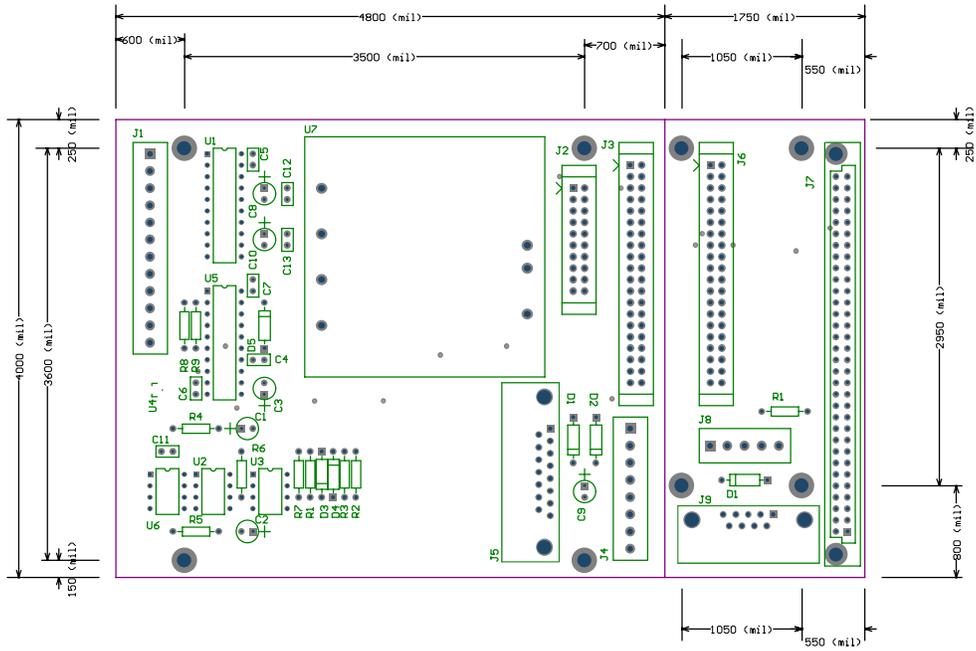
Mechanical layout of APHID-microcontroller interface boards. The boards are cut apart before assembly: the APHID-end is to the left, microcontroller-end to the right.
